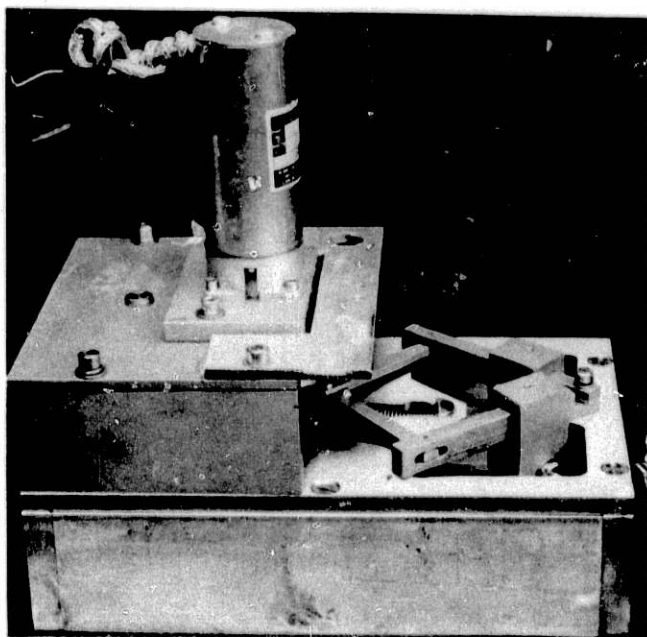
Detailed Photographs of Weld Scanner. Neg. No. MSD 65516.
